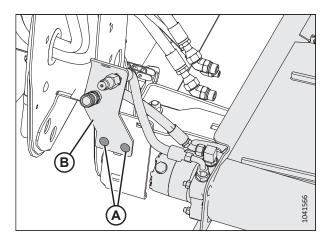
Coupler Mount Bracket – Rear Left of Feed Deck Draper
